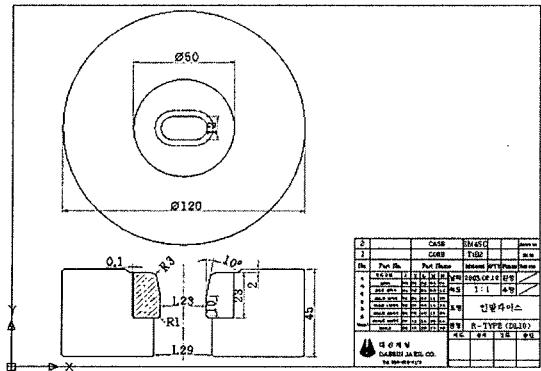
Drawing output for the drawing die of four corner rectangle type
